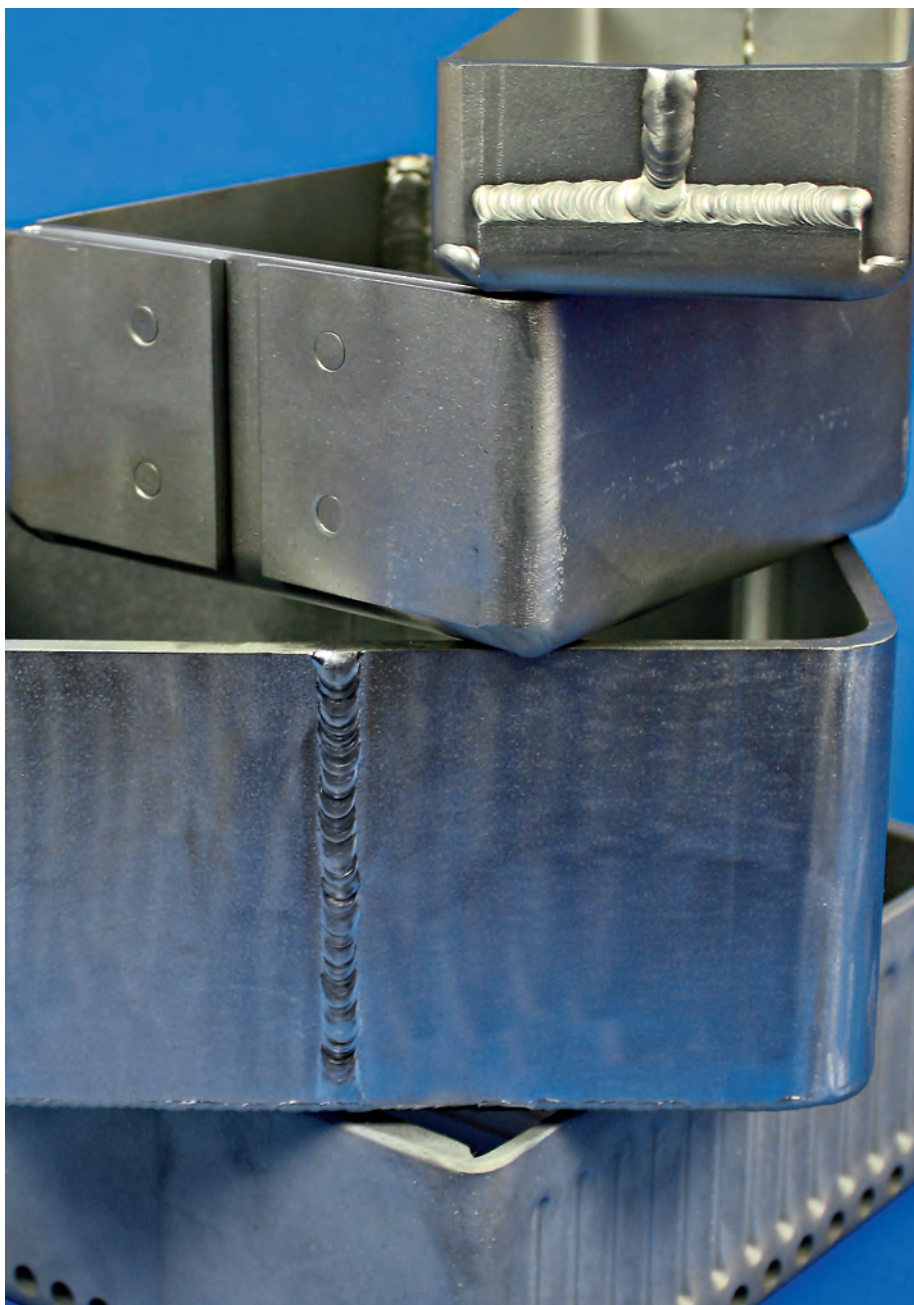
Molybdenum boats, illustrating both basic forming and fabrication techniques and GTA welding to seal crevices at joints. © Elmet Technologies
